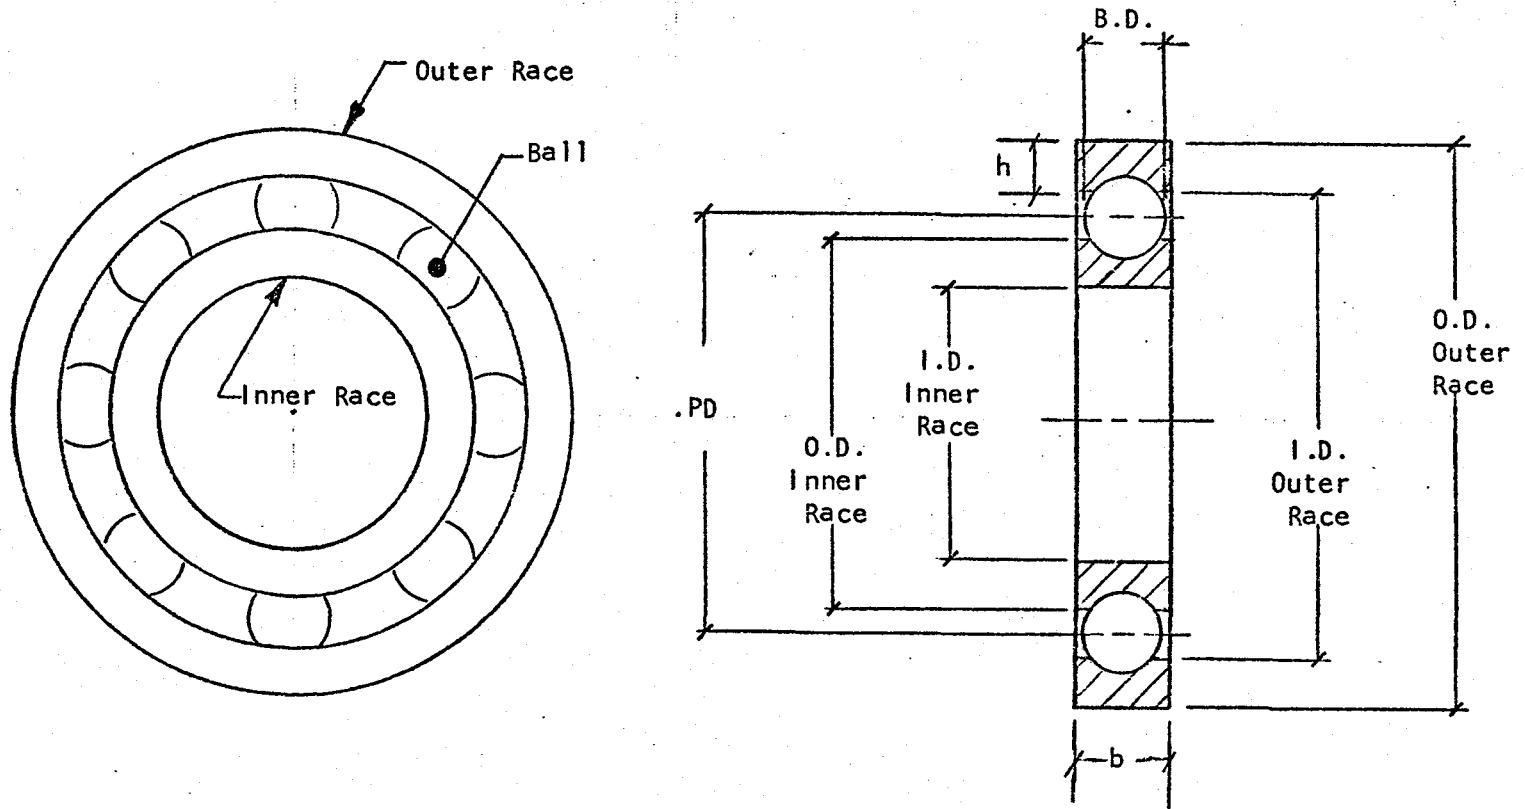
Basic Dimension of a Fafnir 207 Bearing
